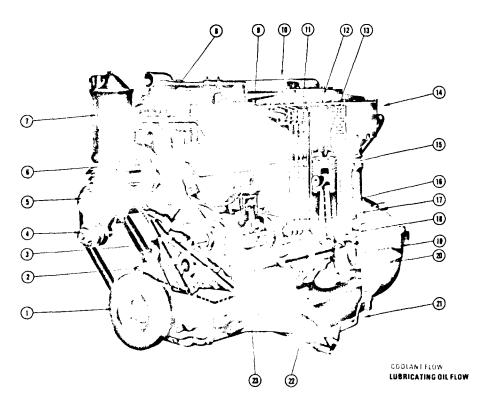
, (LWC-22). Coolant and lubricating oil flow -- NTA Engine
